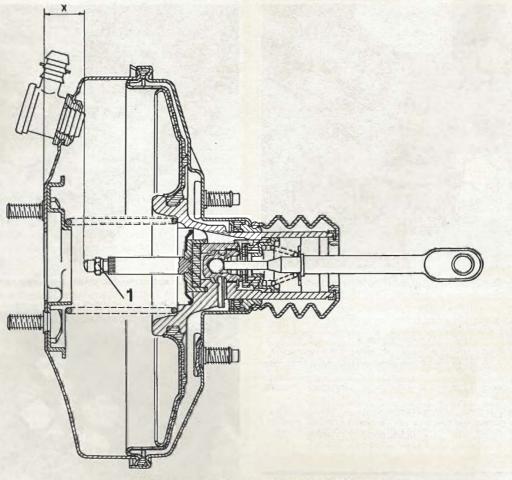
Vacuum servo push rod adjustment (Sec 15)
